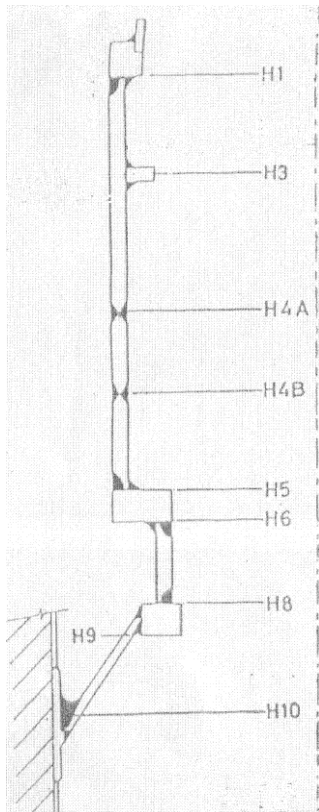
Horizontal welds of TAPS Core Shroud
